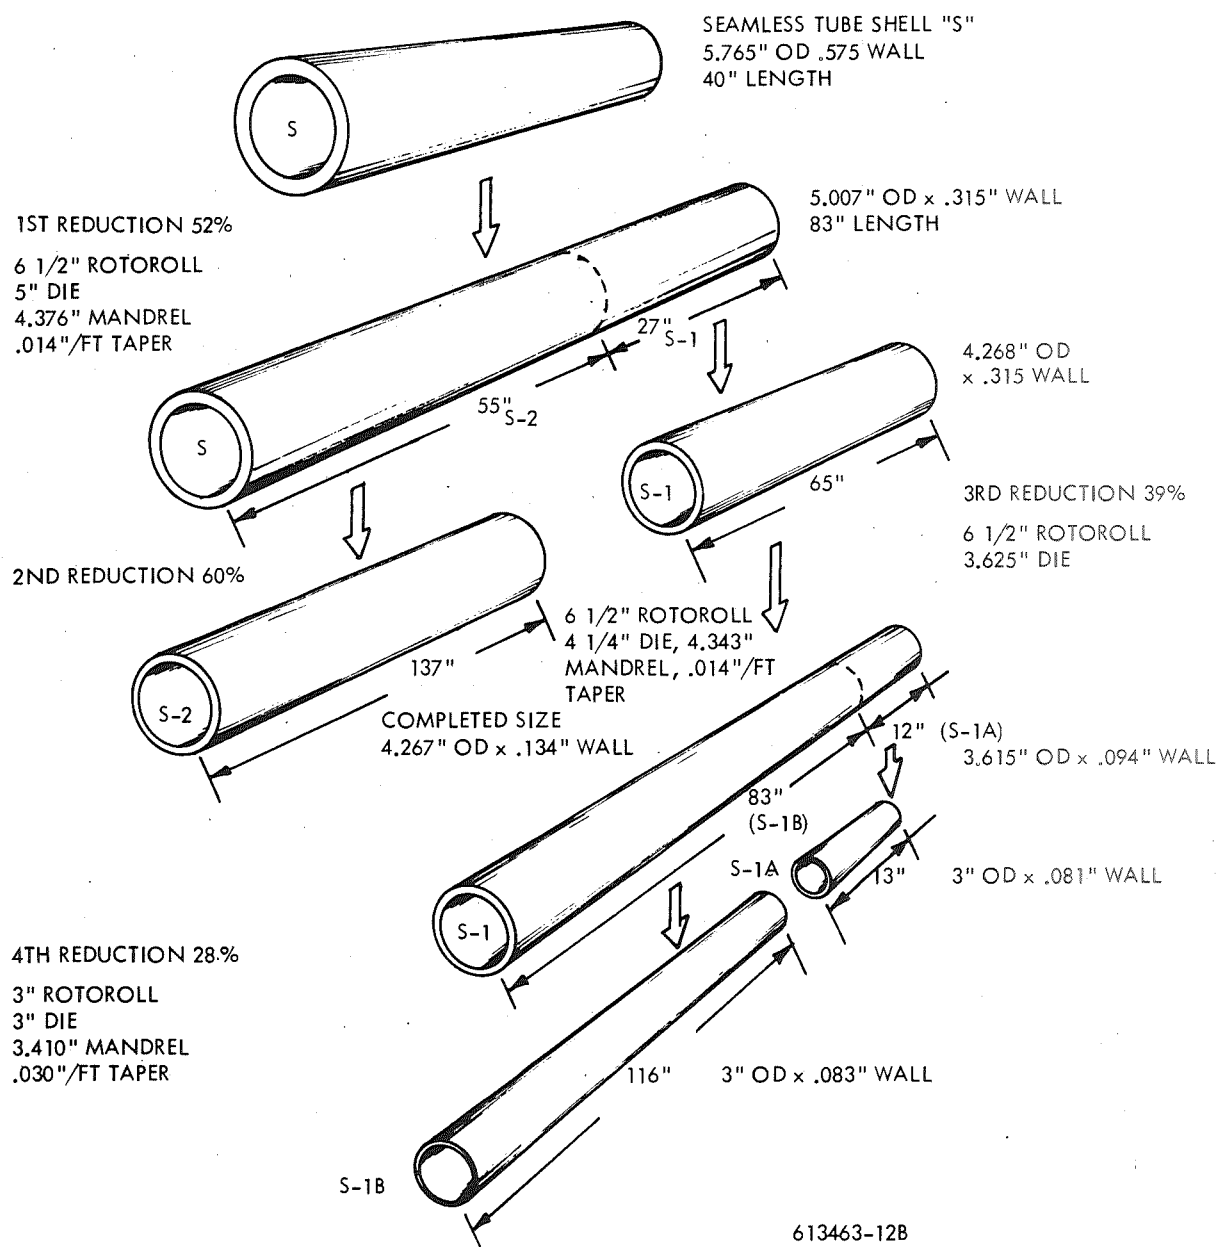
Processing Sequence for Seamless Tube Hollow to 4 1/4" OD and 3" OD Tubing
